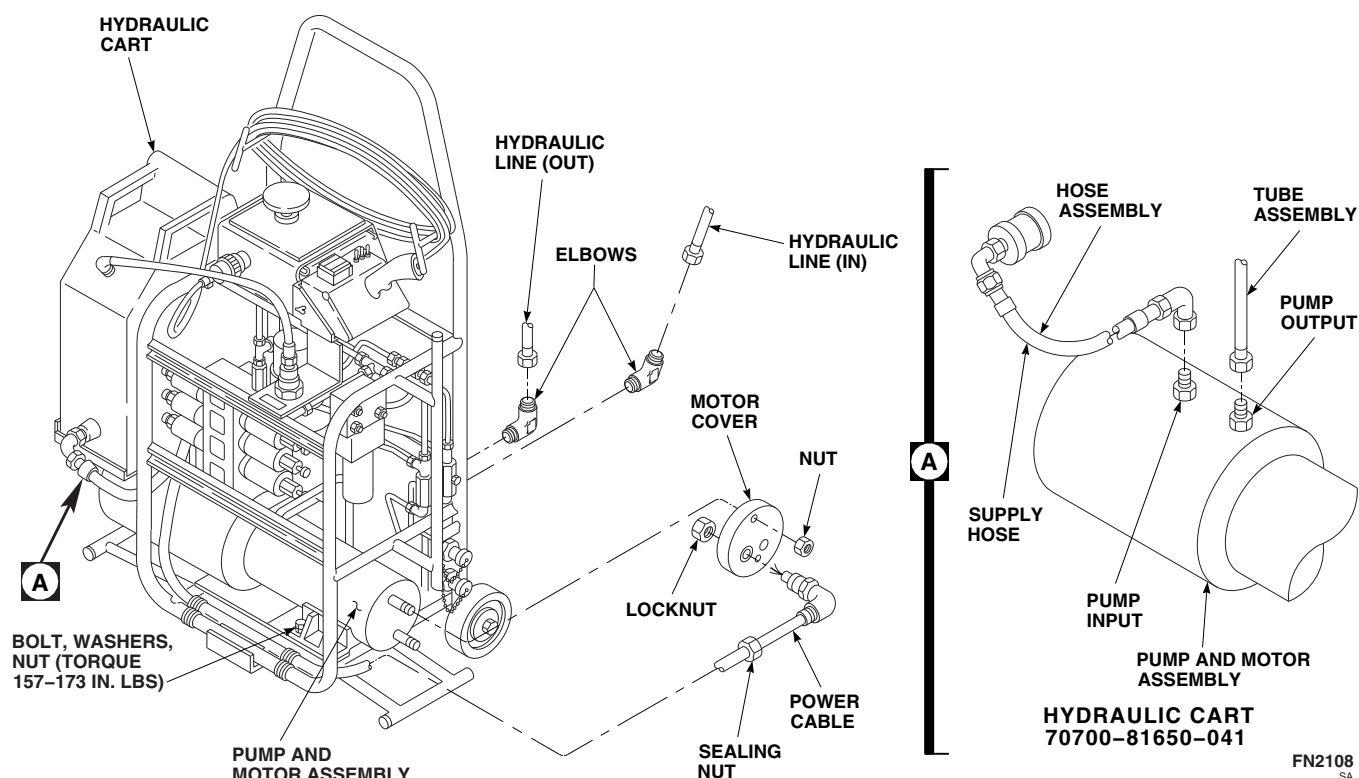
REPLACE AIR TRANSPORT HYDRAULIC CART PUMP AND MOTOR ASSEMBLY
